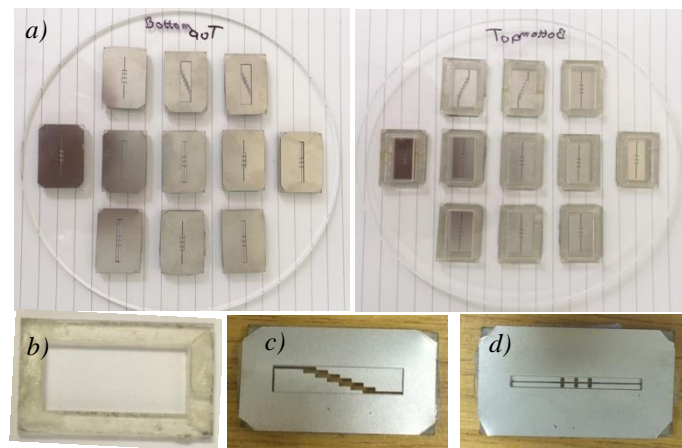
Prepared patterns and Jig of the reduced size microstrip filters, a) top and bottom layers of the disk, disk diameter is 150 mm, b) holders and c) bandpass filter masks, d) lowpass filter mask. Holder and masks dimensions are 20×10 mm.
